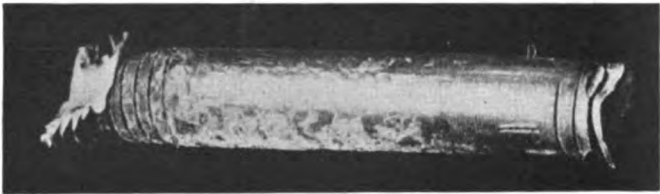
Tool marks are still visible in Monel staybolt removed after nearly 12 years of service
